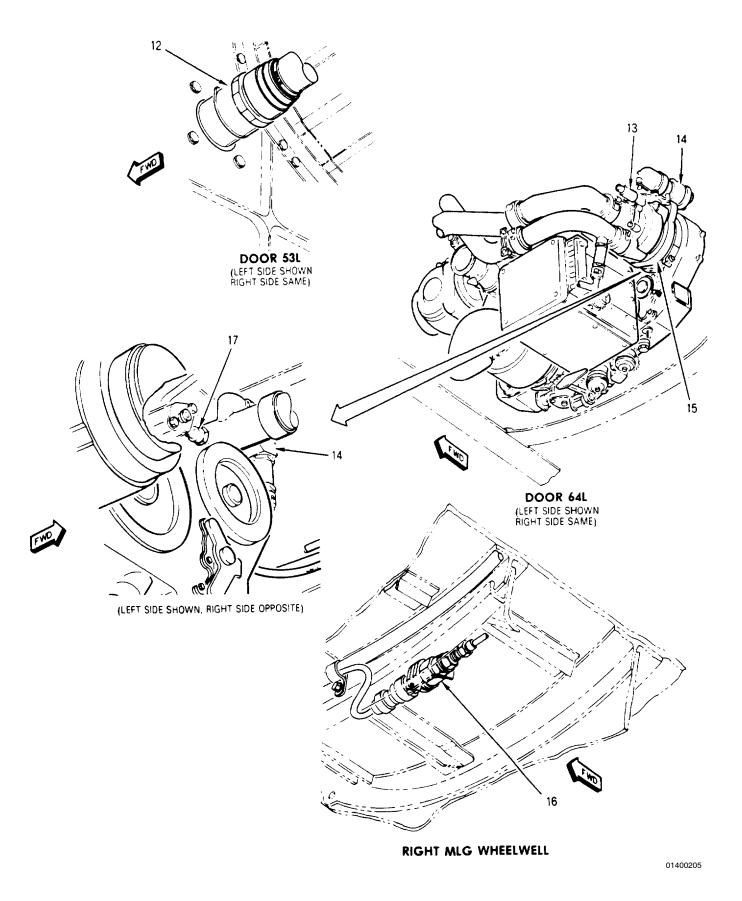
Engine Fuel Supply System Component Locator (Sheet 5)
